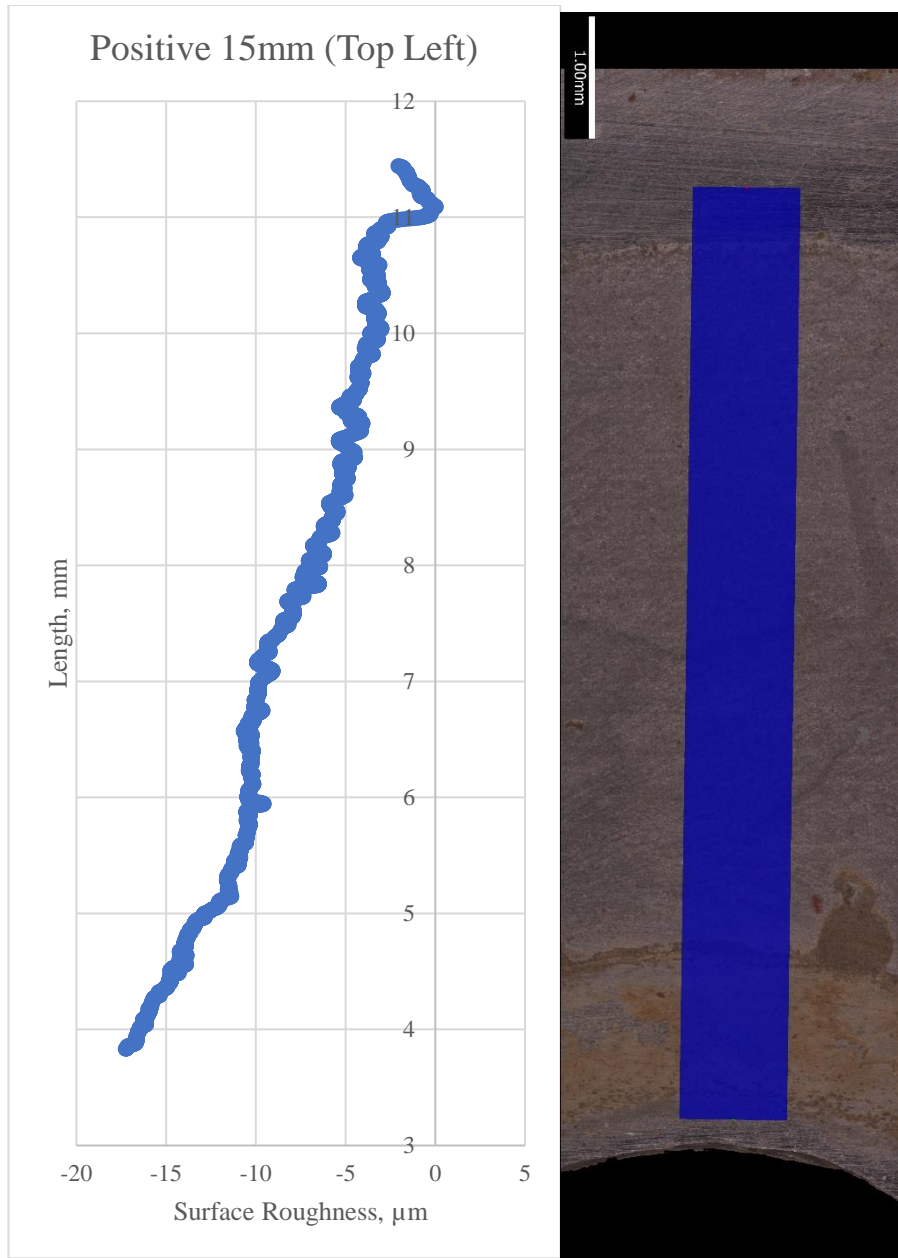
The above figures illustrate corrosion damage of the carbon steel of the top left side of the bolt of the Positive 15mm coupon using surface roughness measurements from the 3D microscope.
